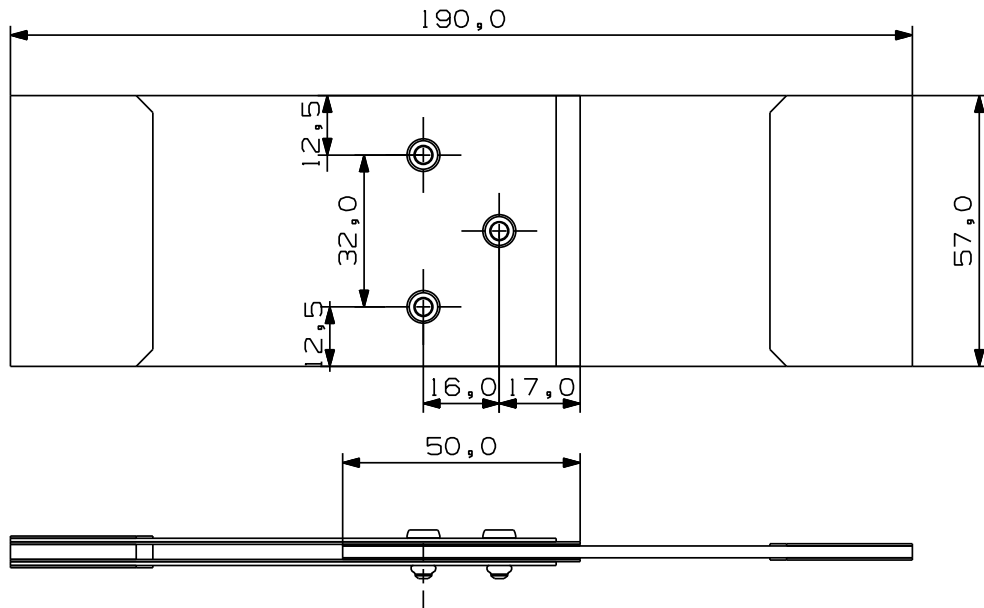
Double lap joint containing three fasteners in a staggered array; dimensions in mm
